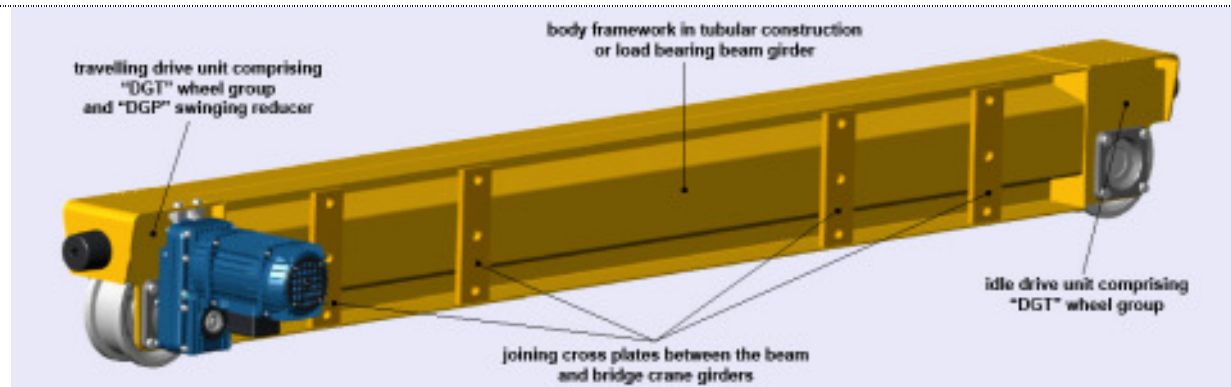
endcarriage for DOUBLE GIRDER bridge crane
